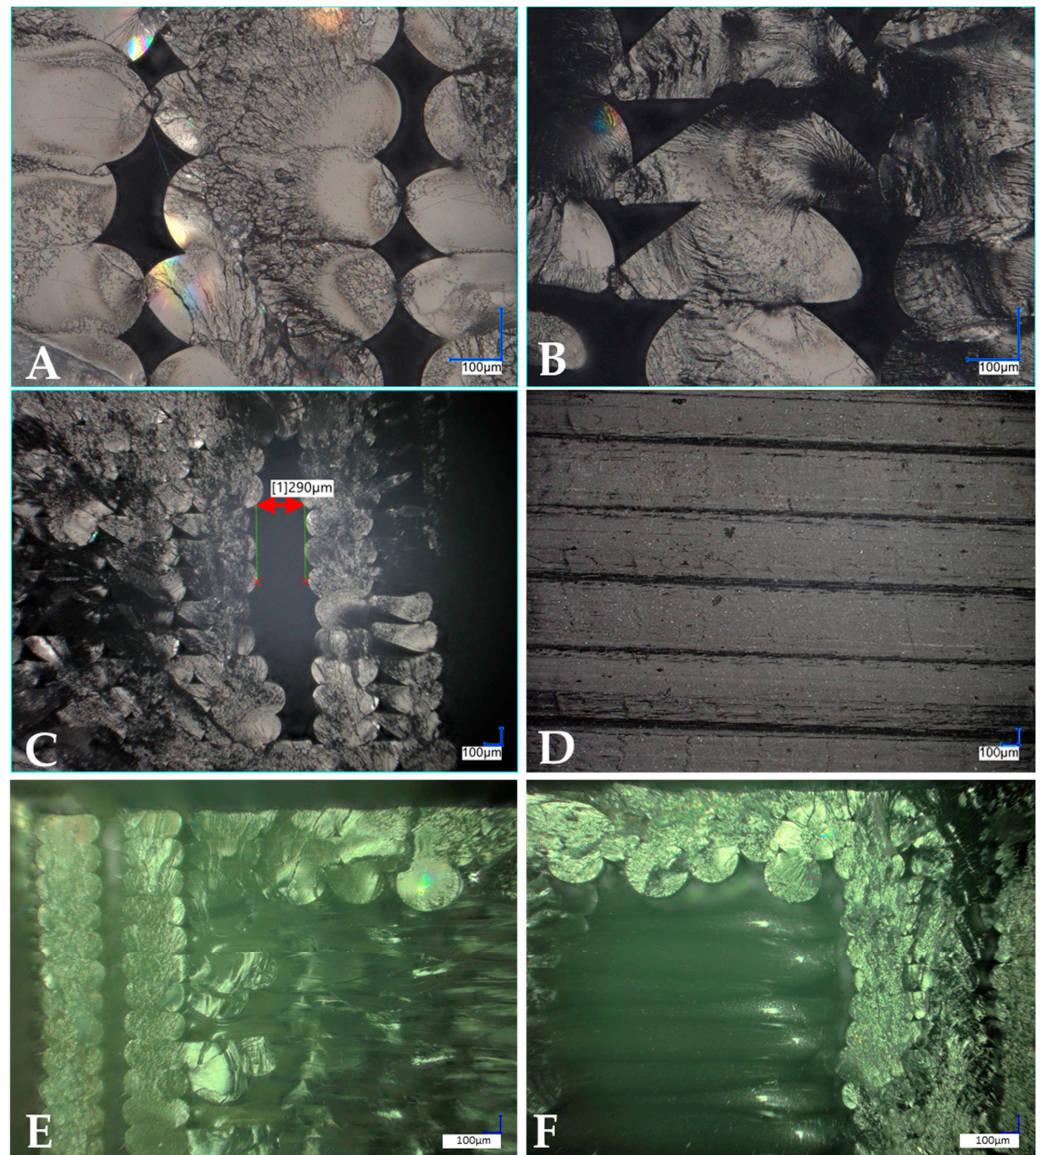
Microscopic photos of fractures and surfaces of printed fittings. Pictures (A–D) printed with longitudinal filling, (E,F) printed with honeycomb filling. (A)—shape and spaces between the fracture layers of the reference sample; (B)—shape and spaces between the fracture layers of the sample modified with MoS₂ (0.25%); (C)—defect of the printed fitting; (D)—fitting surface; (E)—photo of the fracture of the reference sample; (F)—photo of a fracture of a sample modified with MoS₂ (0.5%).
